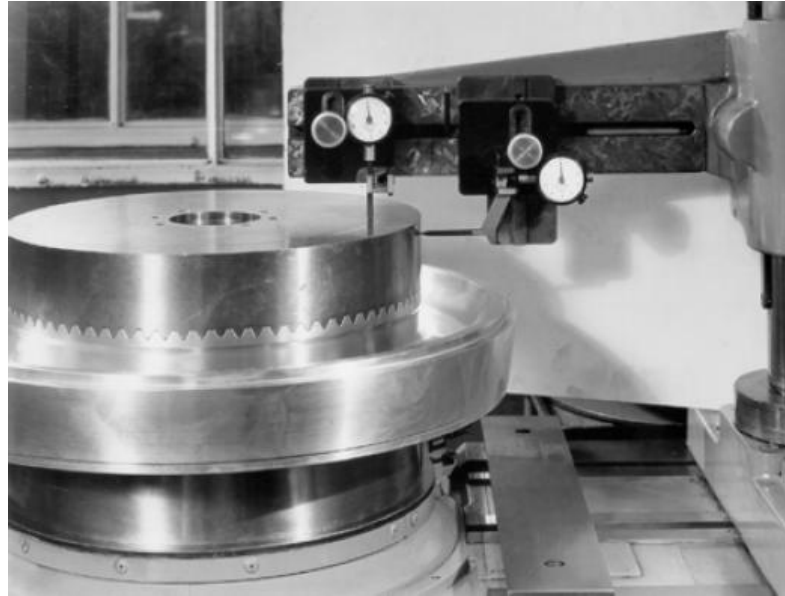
INSPECTION OF AXIAL AND RADIAL RUNOUT OF DOUBLE ENDED PART,
